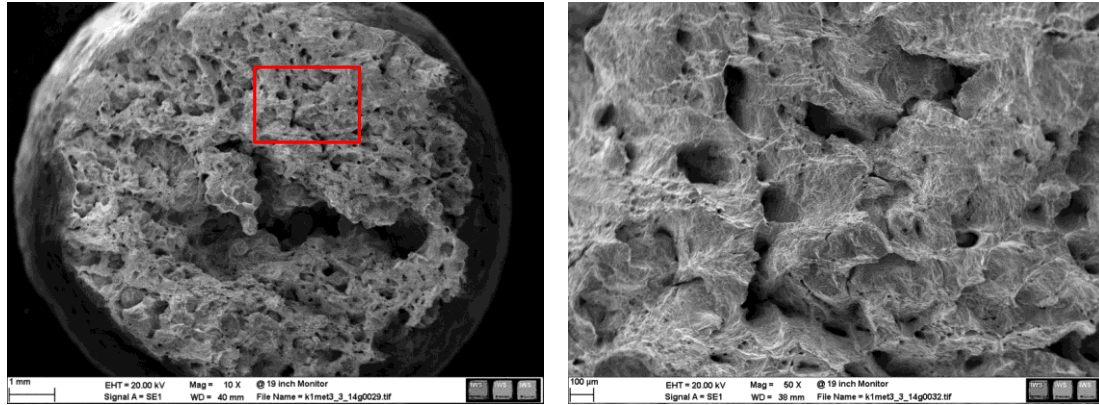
Fracture surface of specimen tested at 1000°C (RA=58%).
